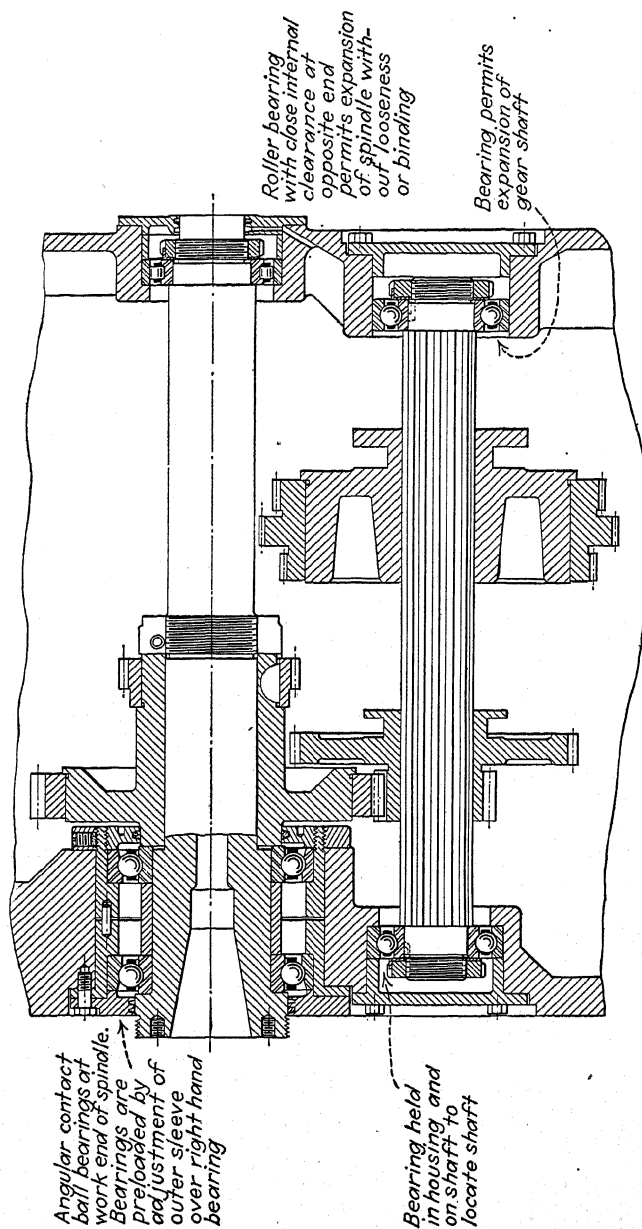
Typical bearing installation. Application of ball and roller bearings to a milling-machine drive. (Courtesy Norma-Hoffman Bearings Corporation.)
